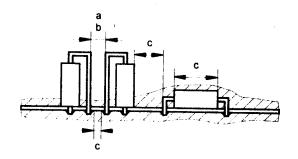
Board with soldered leads folded or cropped NOTE The thickness of the coating is not drawn to scale.
